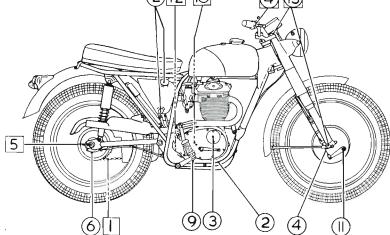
Key lubrication points. (Numbers in circles refer to right side of machine: numbers in squares refer to left side of machine).
